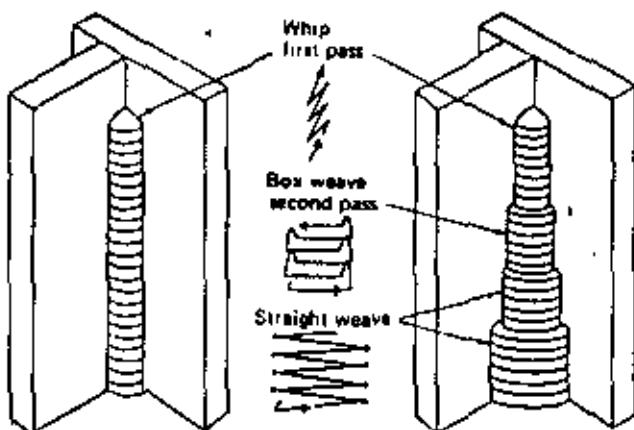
Technique for vertical welding with fast-freeze electrodes.
